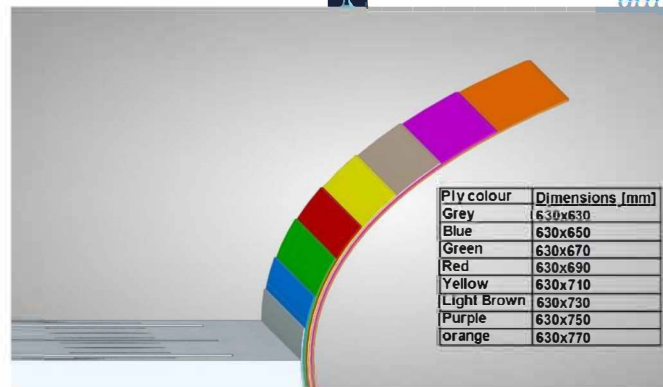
Each set of 8 prepreg plies placed on each half-mould prior to closing the mould and vacuum bag assembly
